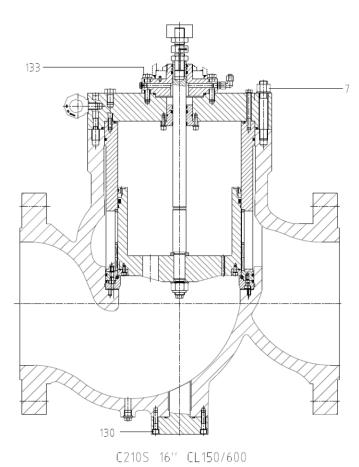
Bolt for pressure retaining parts of HON C210S 16" cl.150/600
